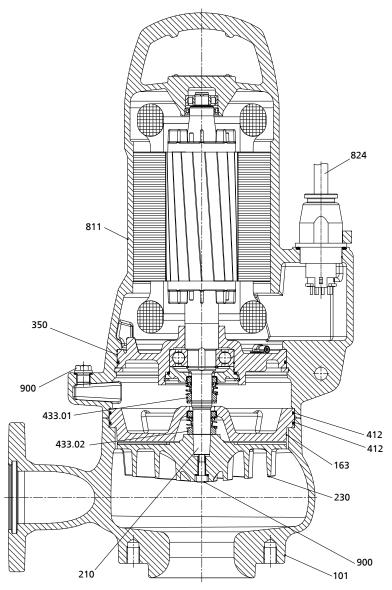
General assembly drawing, example: Amarex KRT F65-215
